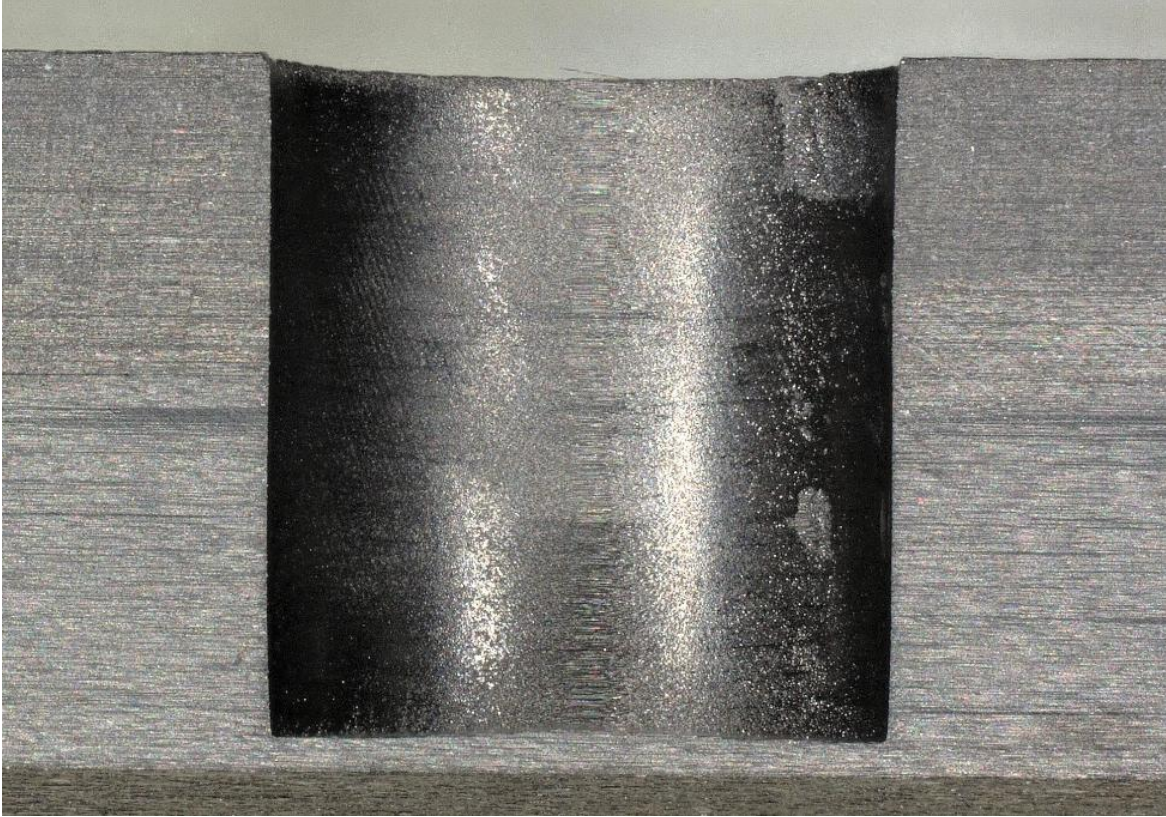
Cross-section micrograph of drilled hole #2 of ENF Specimen. Drilling parameters:
